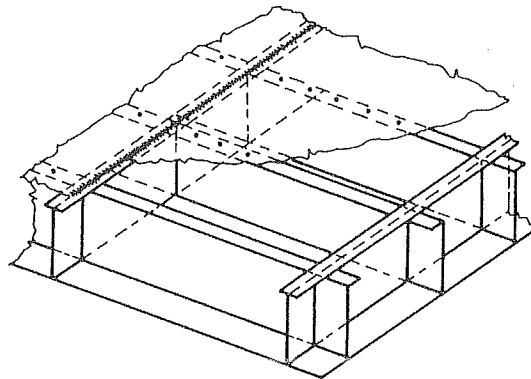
Cellular plate with a combination of fillet and arc spot welds
